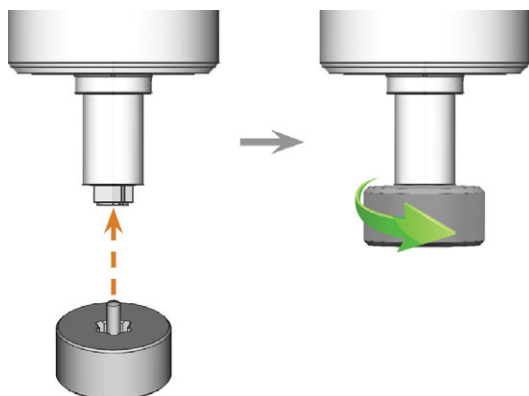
TIGHTENING THE COLLET CHUCK WITH THE KNURLED NUT; RECESS IN KNURLED NUT MARKED ORANGE
